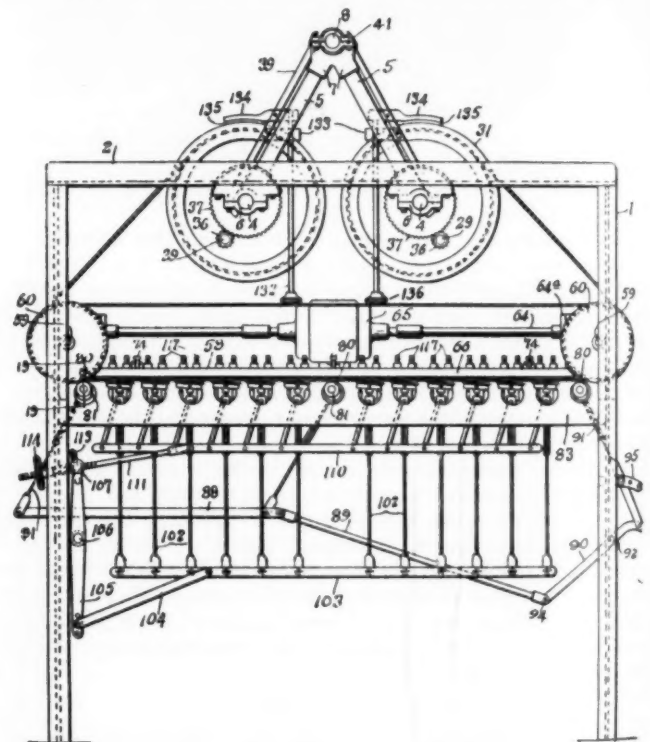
ROBBINS' MACHINE FOR MAKING STEEL WOOL
